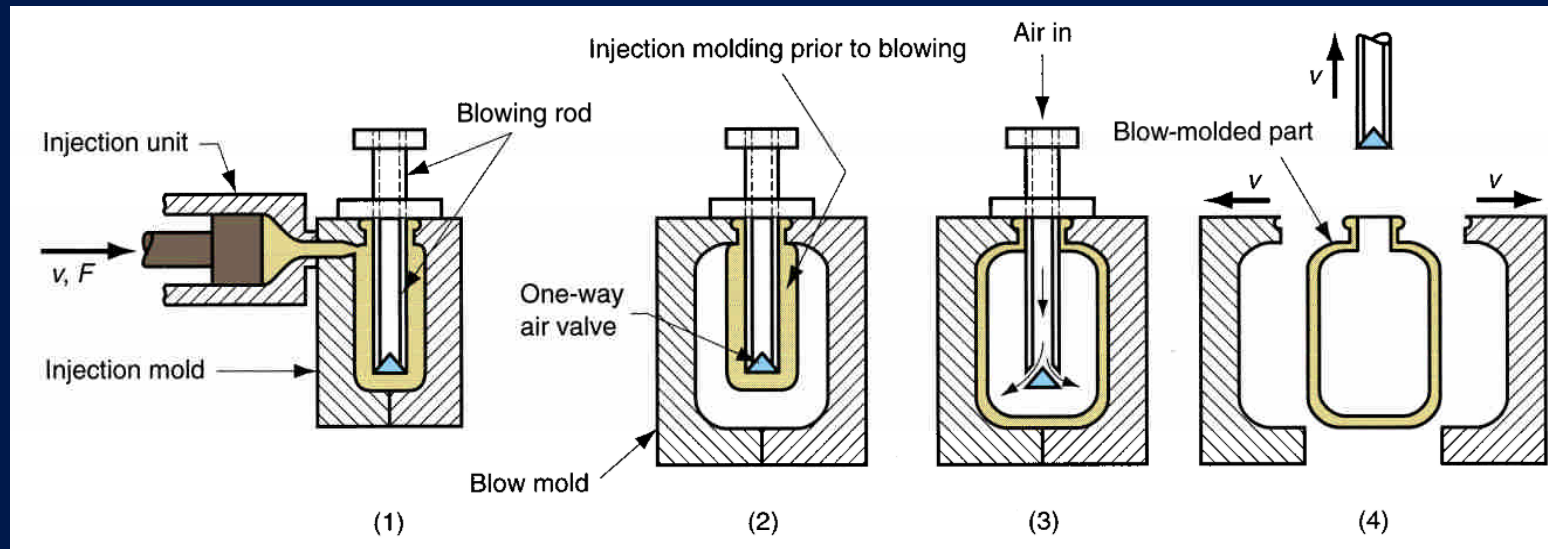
Injection blow molding: (1) parison is injected molded around a blowing rod; (2) injection mold is opened and parison is transferred to a blow mold; (3) soft polymer is inflated to conform to the blow mold; and (4) blow mold is opened and blown product is removed
